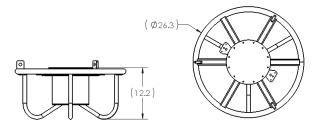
Front and Top View of the 6 Hook Carousel Cage (C2-6HC) shown without hooks.
